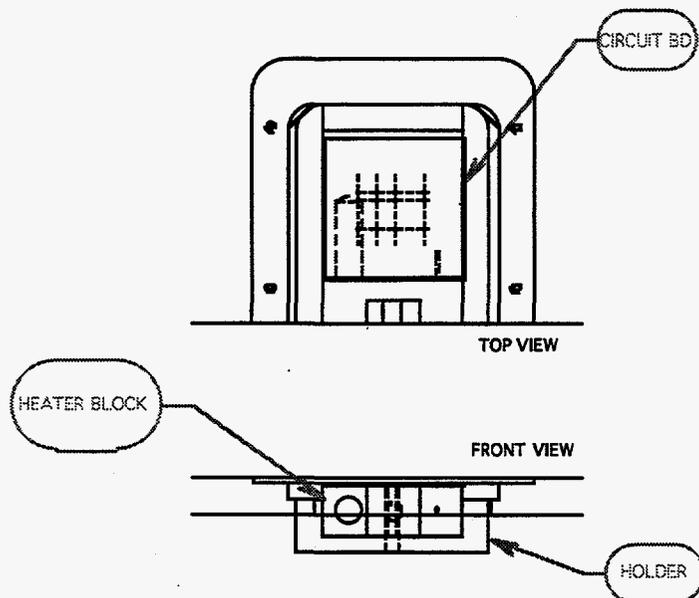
The circuit board heater attachment is mounted below the pulse generator (which is not shown).
